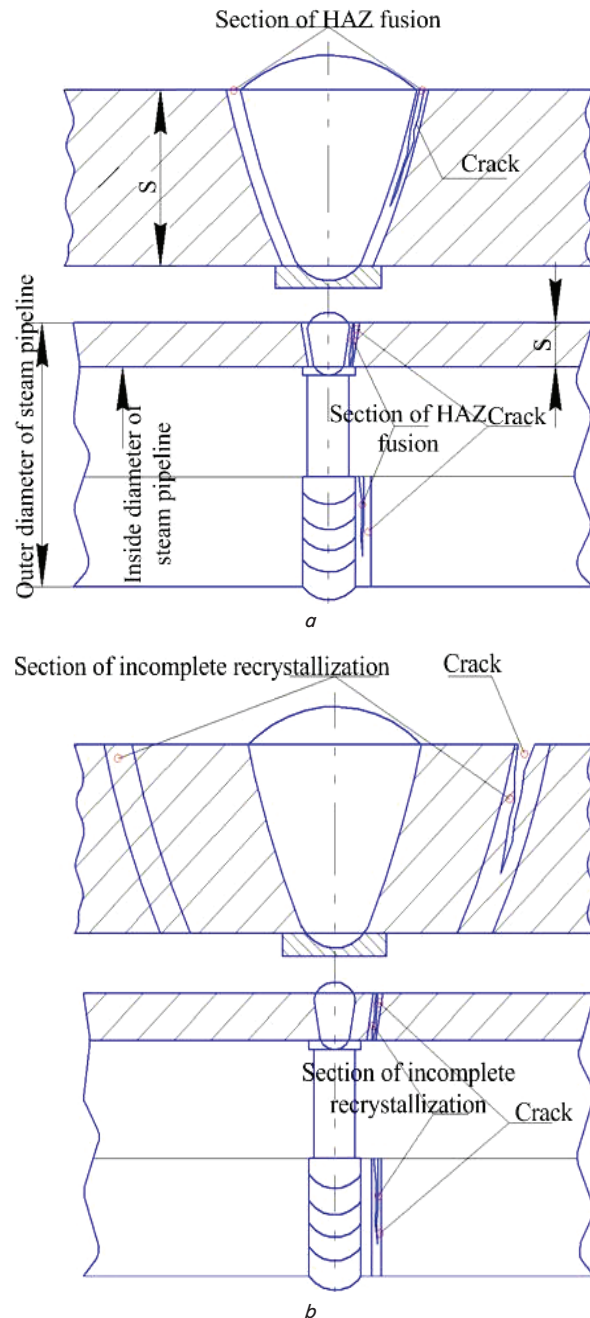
Scheme of typical damages of the welded joints of steam pipelines by the creep cracks: cracks that are formed at the section of incomplete recrystallization: Crack – crack; Section of incomplete recrystallization – section of incomplete recrystallization; S – thickness of the wall of steam pipeline; Section of HAZ fusion – section of HAZ fusion; Outer diameter of steam pipeline – outer diameter of steam pipeline; Inside diameter of steam pipeline – inside diameter of steam pipeline
